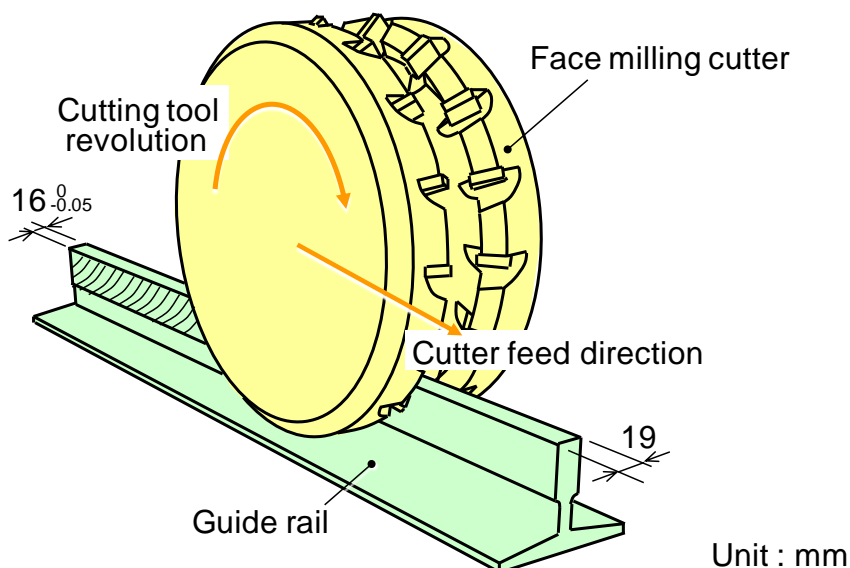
7 Proposed method of machining of guide rail with combined face milling cutters.
